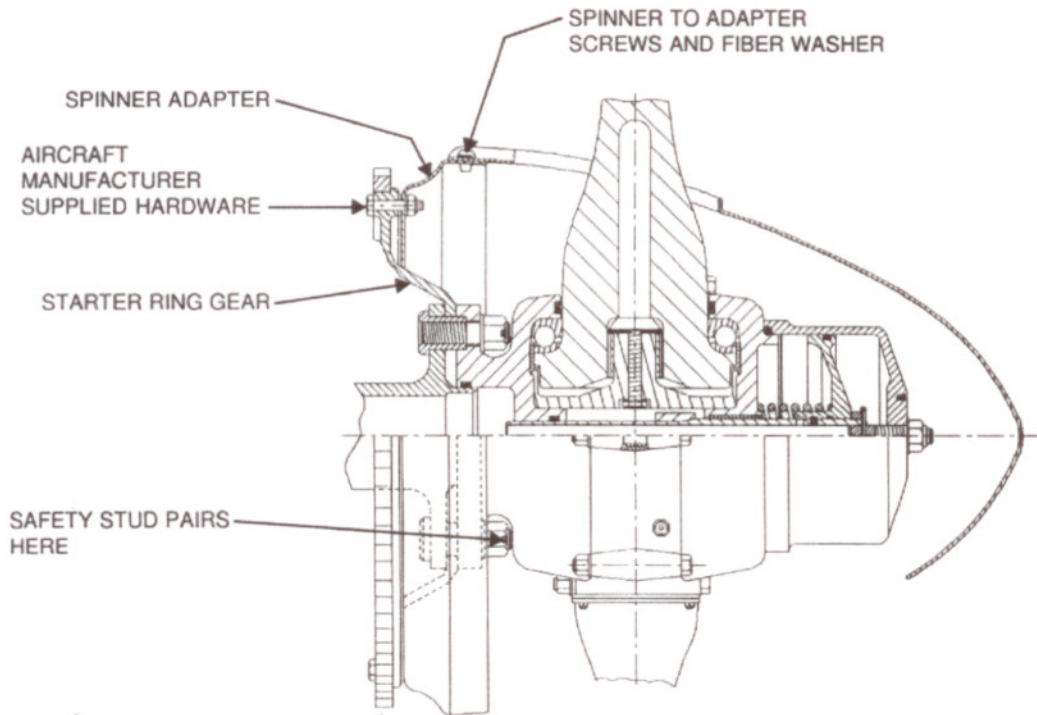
Spinner Adapter and Spinner Mounting (Starter Ring Gear Mount)
